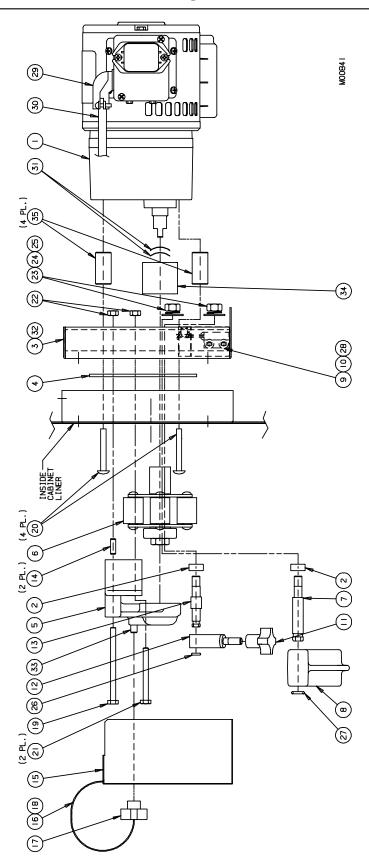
Mix Transfer System — RMT (Sheet 2 of 2)
